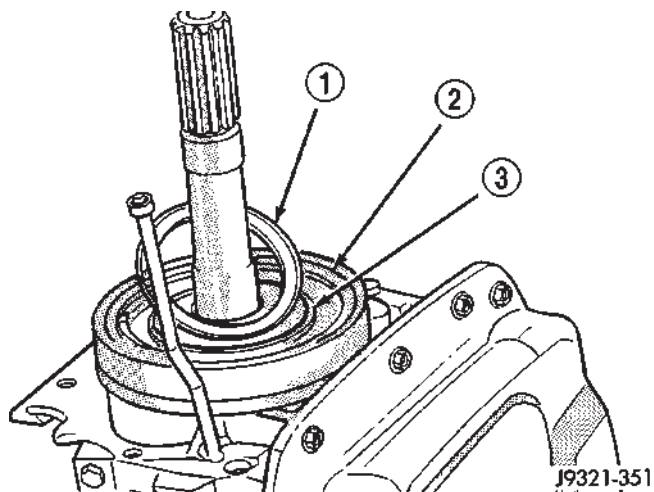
Overdrive Piston Thrust Bearing Removal/Installation
